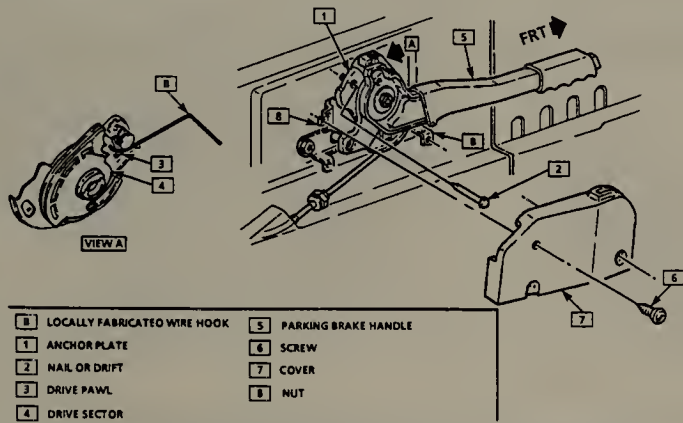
Before beginning caliper removal, you must disable the parking brake automatic adjuster—1996 vehicle shown
